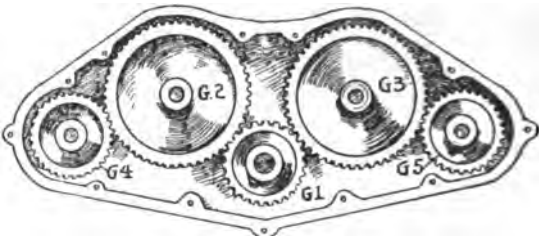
End view of the cam gears and drive gear. The two cam gears are called "half time" gears, because they revolve just one half the time or revolutions as the drive gear. G1—drive gear, on crank shaft. G3, cam gear to drive inlet cams. G2, cam gear to drive exhaust cams. G4 and G5 are extra gears to drive magneto and generator. ("T" head engine.)
